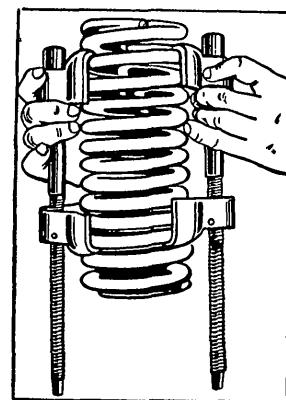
Showing application of spring clamps when removing and installing front spring on 1952 passenger car
